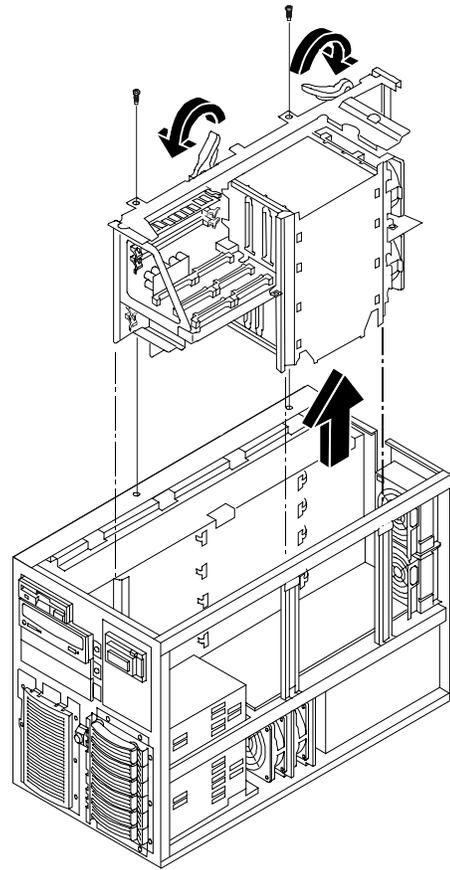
Removing the System Board Assembly from the LH 6000 NetServer
